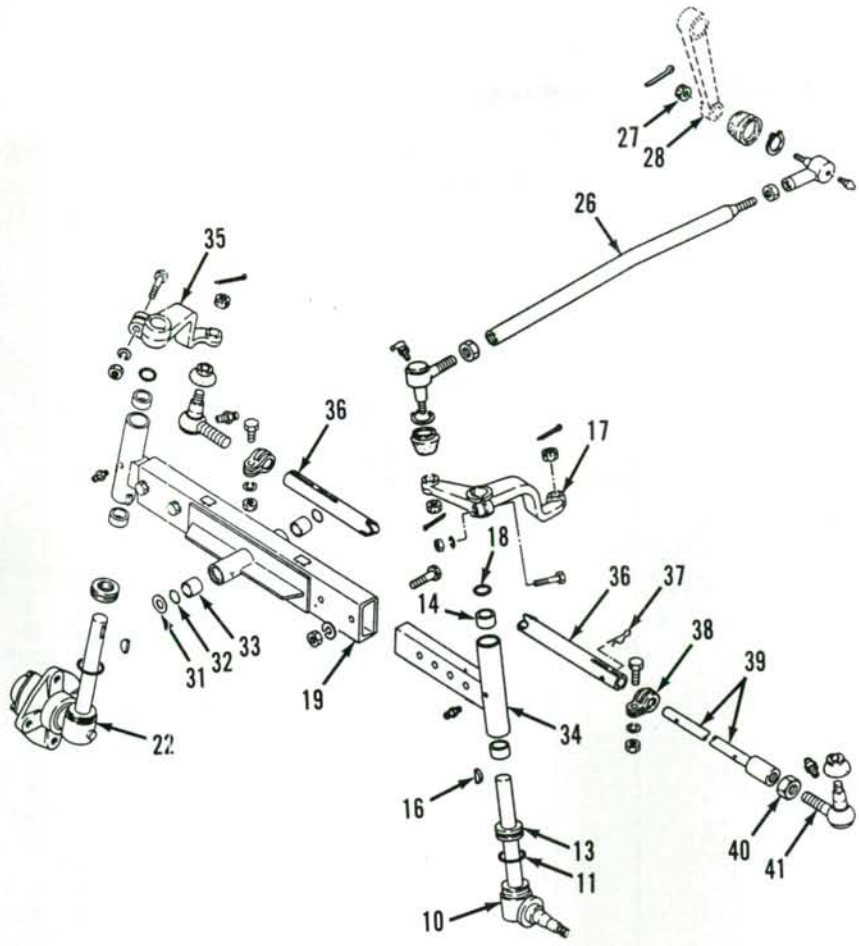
Exploded view of adjustable axle used on some 245 and 255 models.
